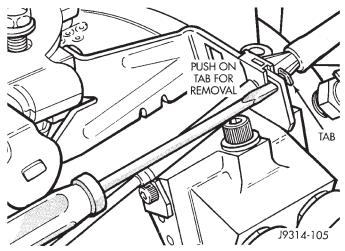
Cable Release Tab—5.2L/5.9L Engines— Typical
